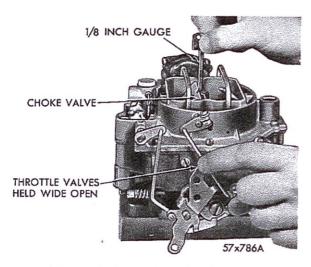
Choke Unloaded Adjustment (Rear Carburetor)
